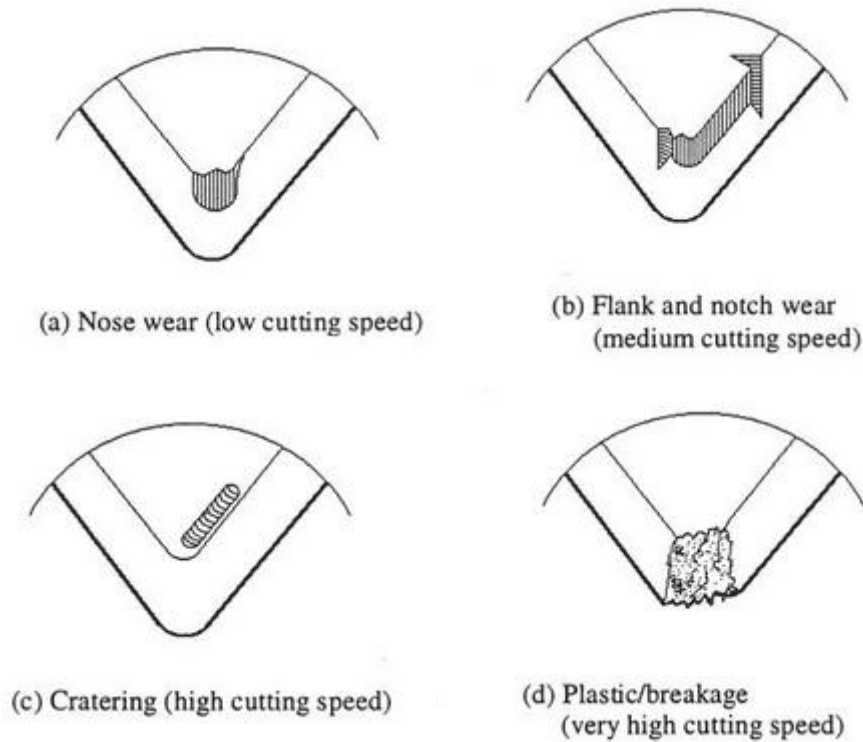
Cutting tool wear forms in orthogonal cutting.
